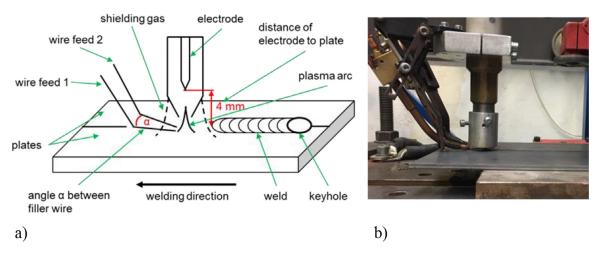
Welding setup of plasma arc multi-wire process with two filler wires. a) Schematic picture of plasma multi wire welding, b) picture of the used plasma welding torch.
